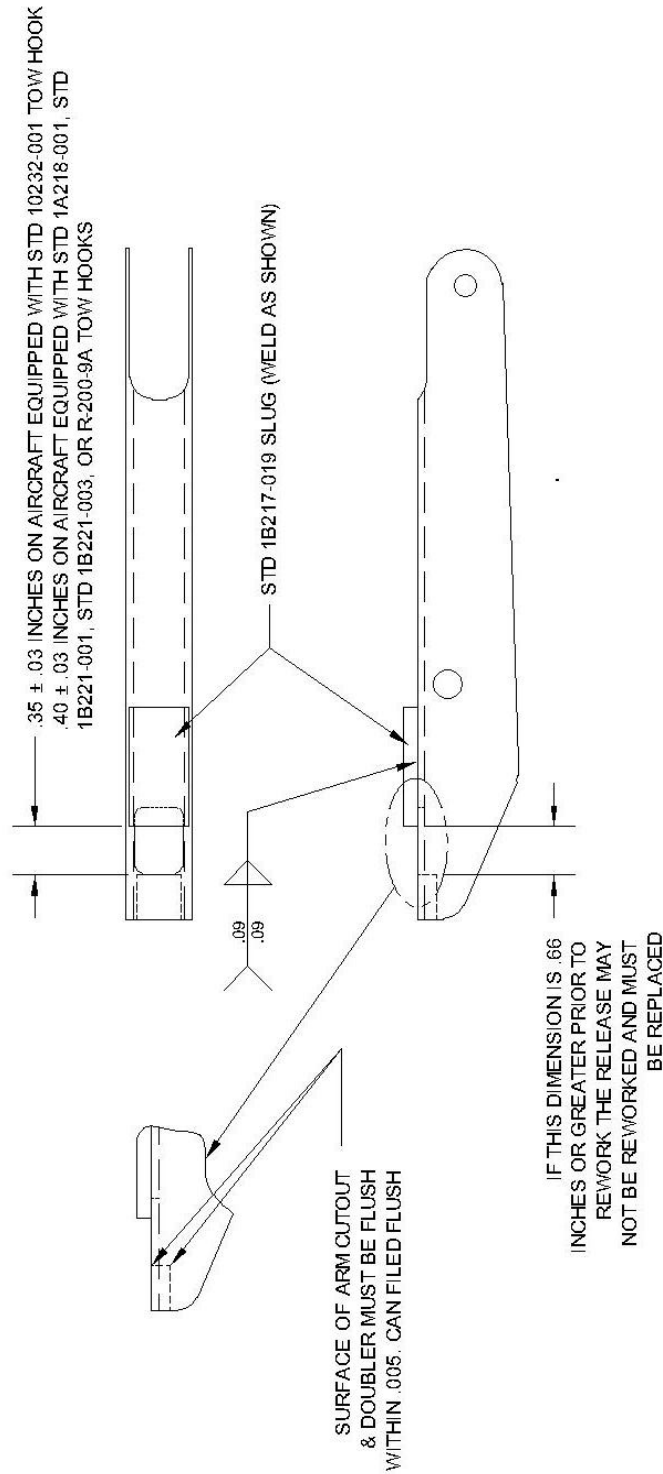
TOW HOOK INSPECTION AND REWORK (SHEET 2 OF 2)
